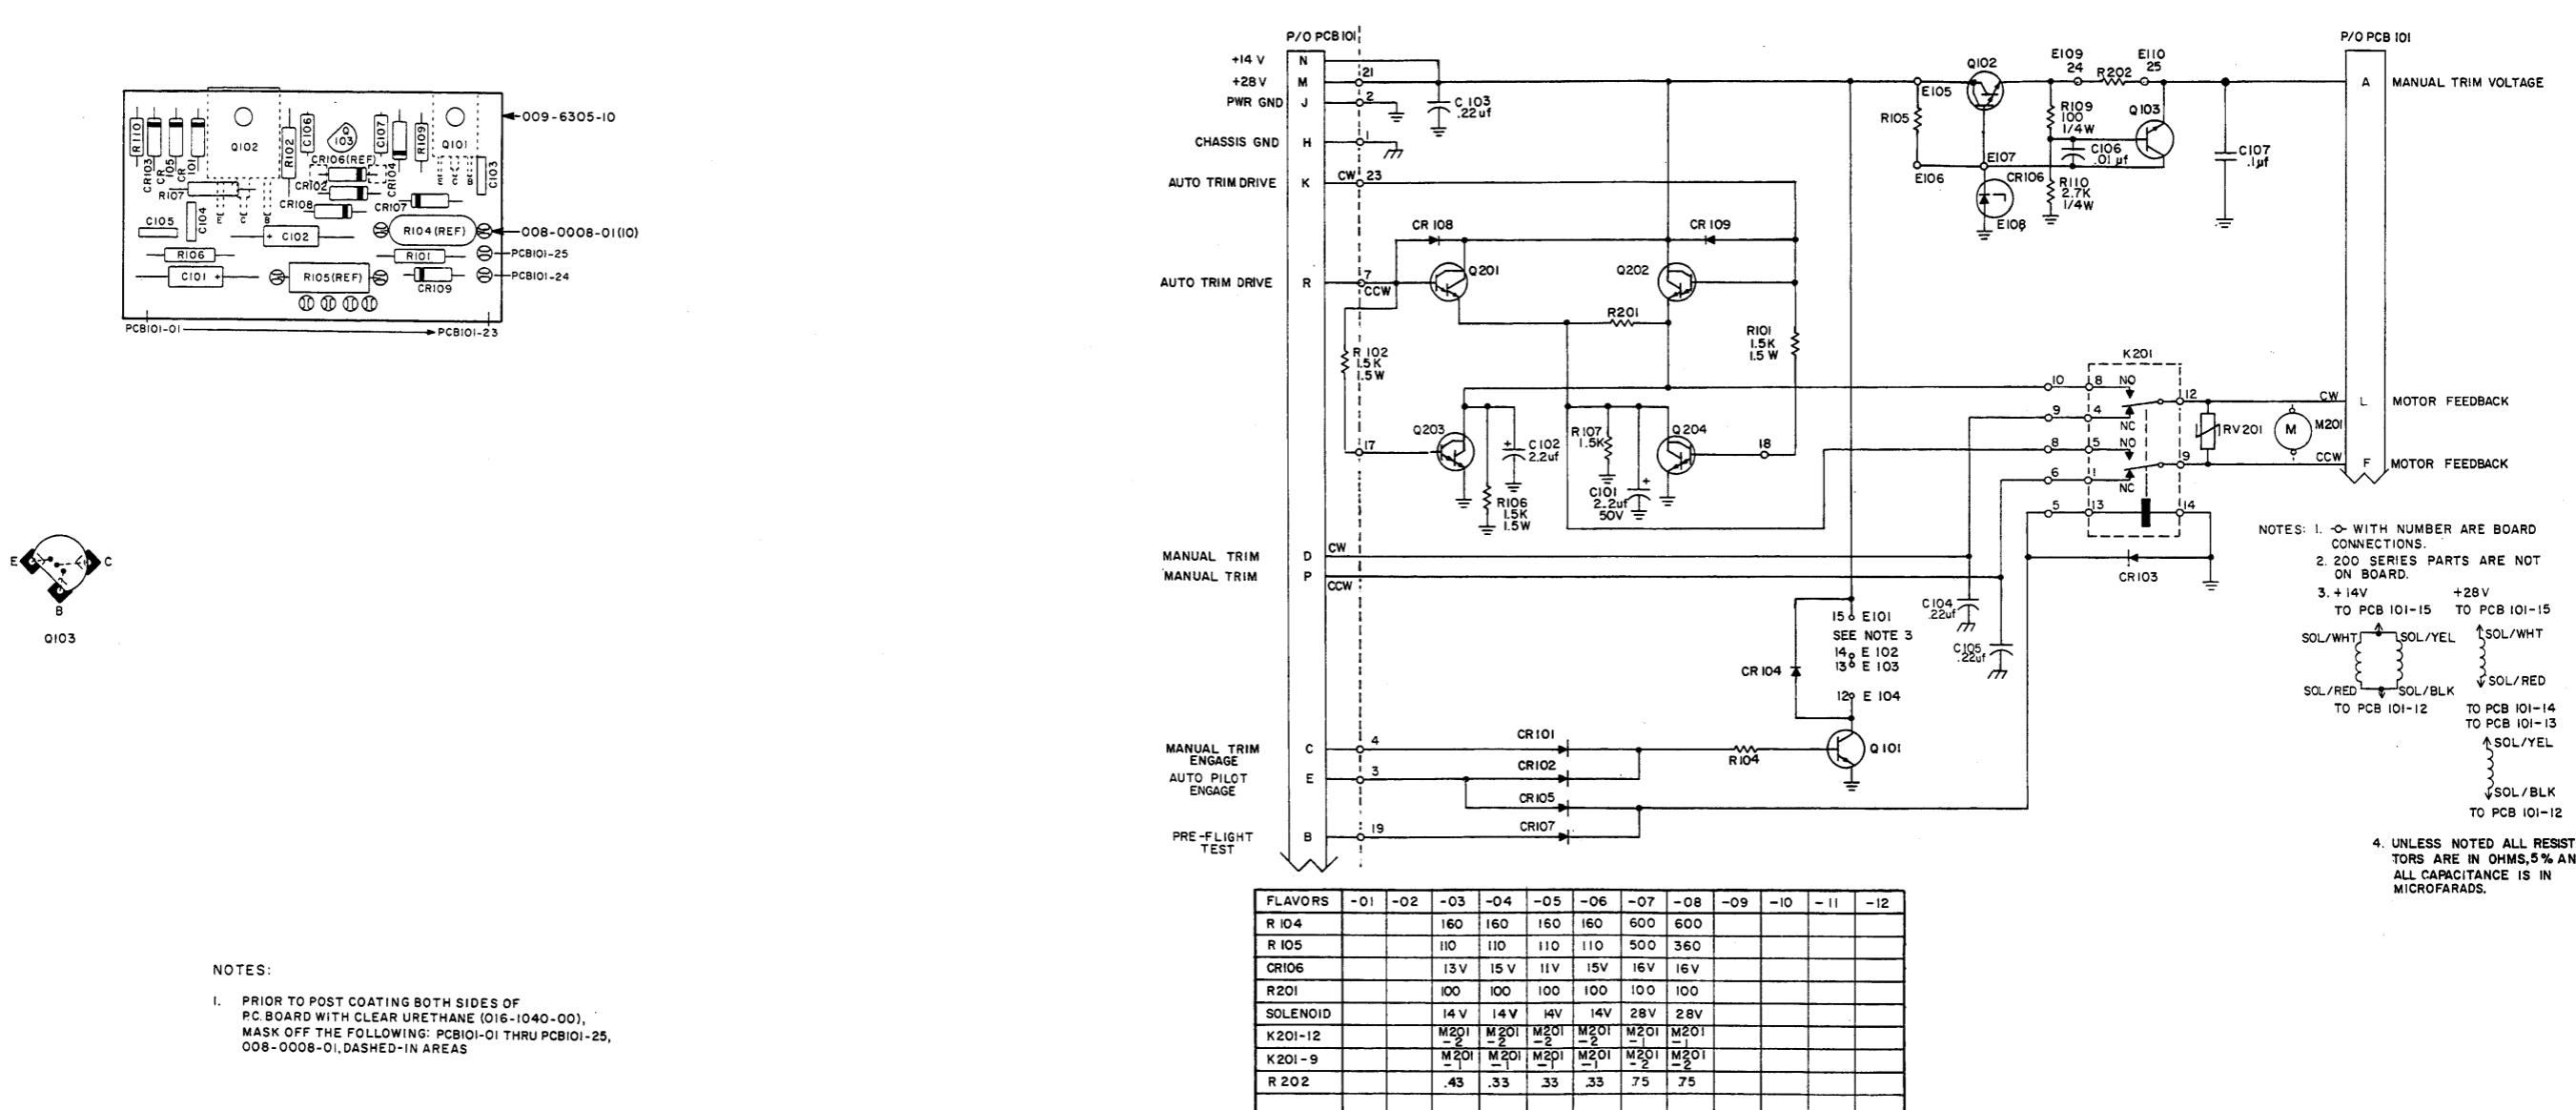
KS 179 PITCH TRIM SERVO PCB ASSEMBLY AND SCHEMATIC
